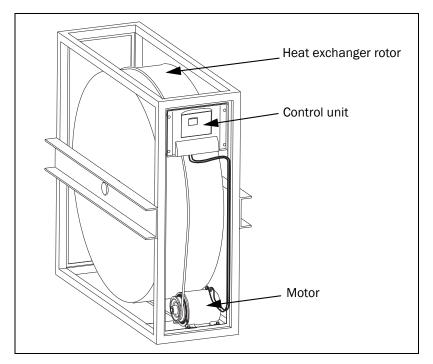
Emotron motor and Control unit for rotary heat exchangers
